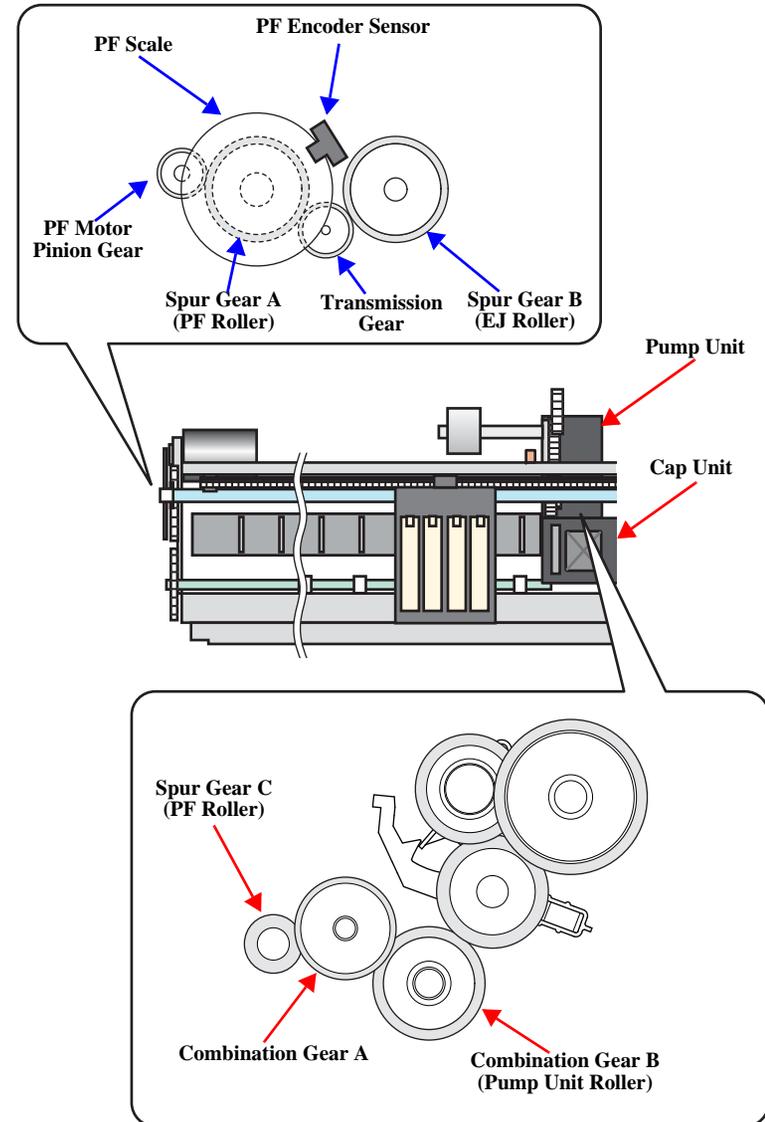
PF Motor Drive Transmission to Pump Unit
